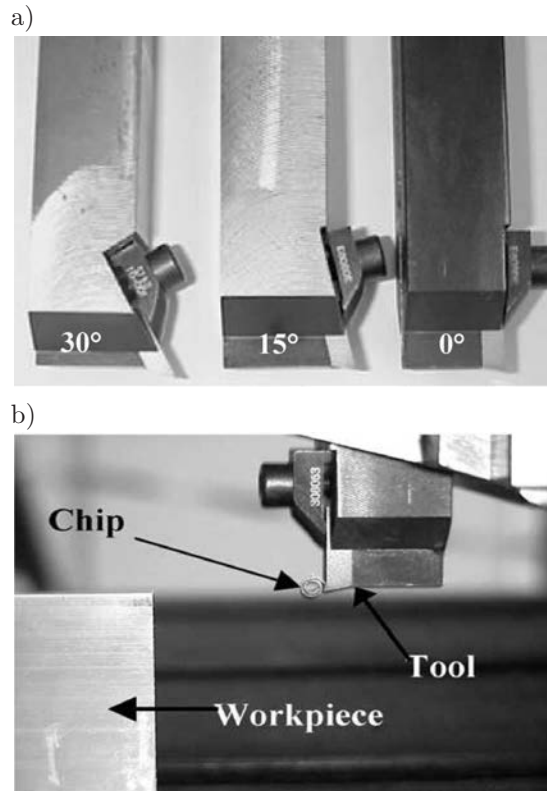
Experimental setup used for the numerical analysis [5]: a) tool geometry with different tool rake angles, b) orthogonal cutting device.
